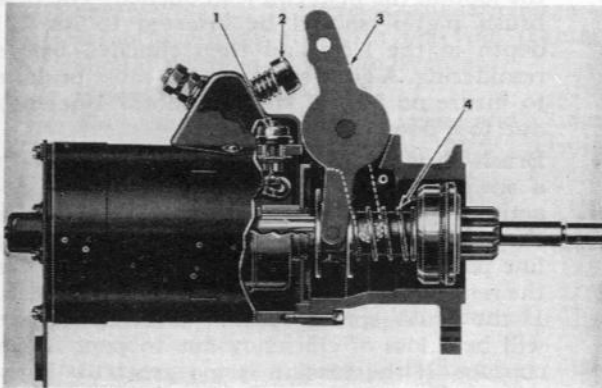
STARTING MOTOR WITH CLUTCH DRIVE
